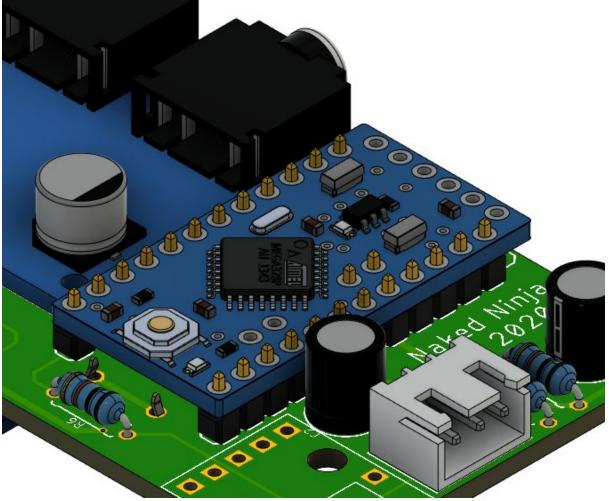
Angle back view of VU Stick V1.2 PCB with Arduino Pro Mini soldered to male headers.
